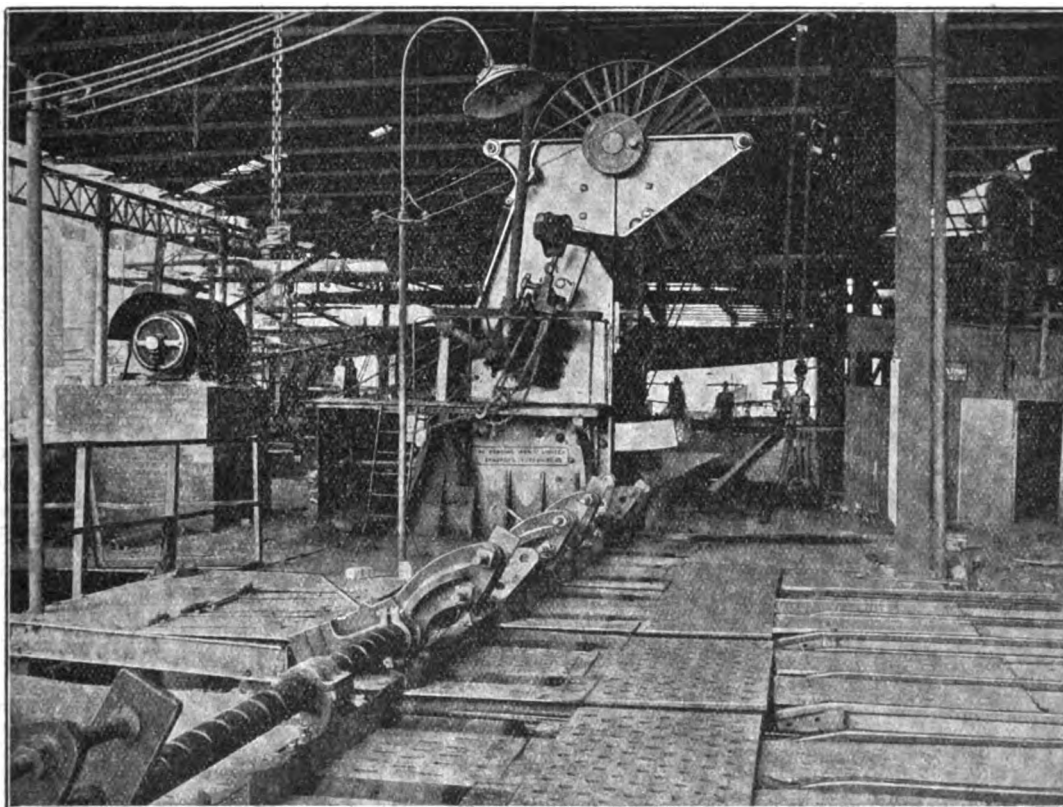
HOT SAW DRIVEN BY 55-H.P. WESTINGHOUSE MOTOR; ALSO FINISHING ROLLS, FEED ROLLS, SKIDS, &C., OF 32-IN. MILL, ALL OF WHICH ARE MOTOR DRIVEN.
